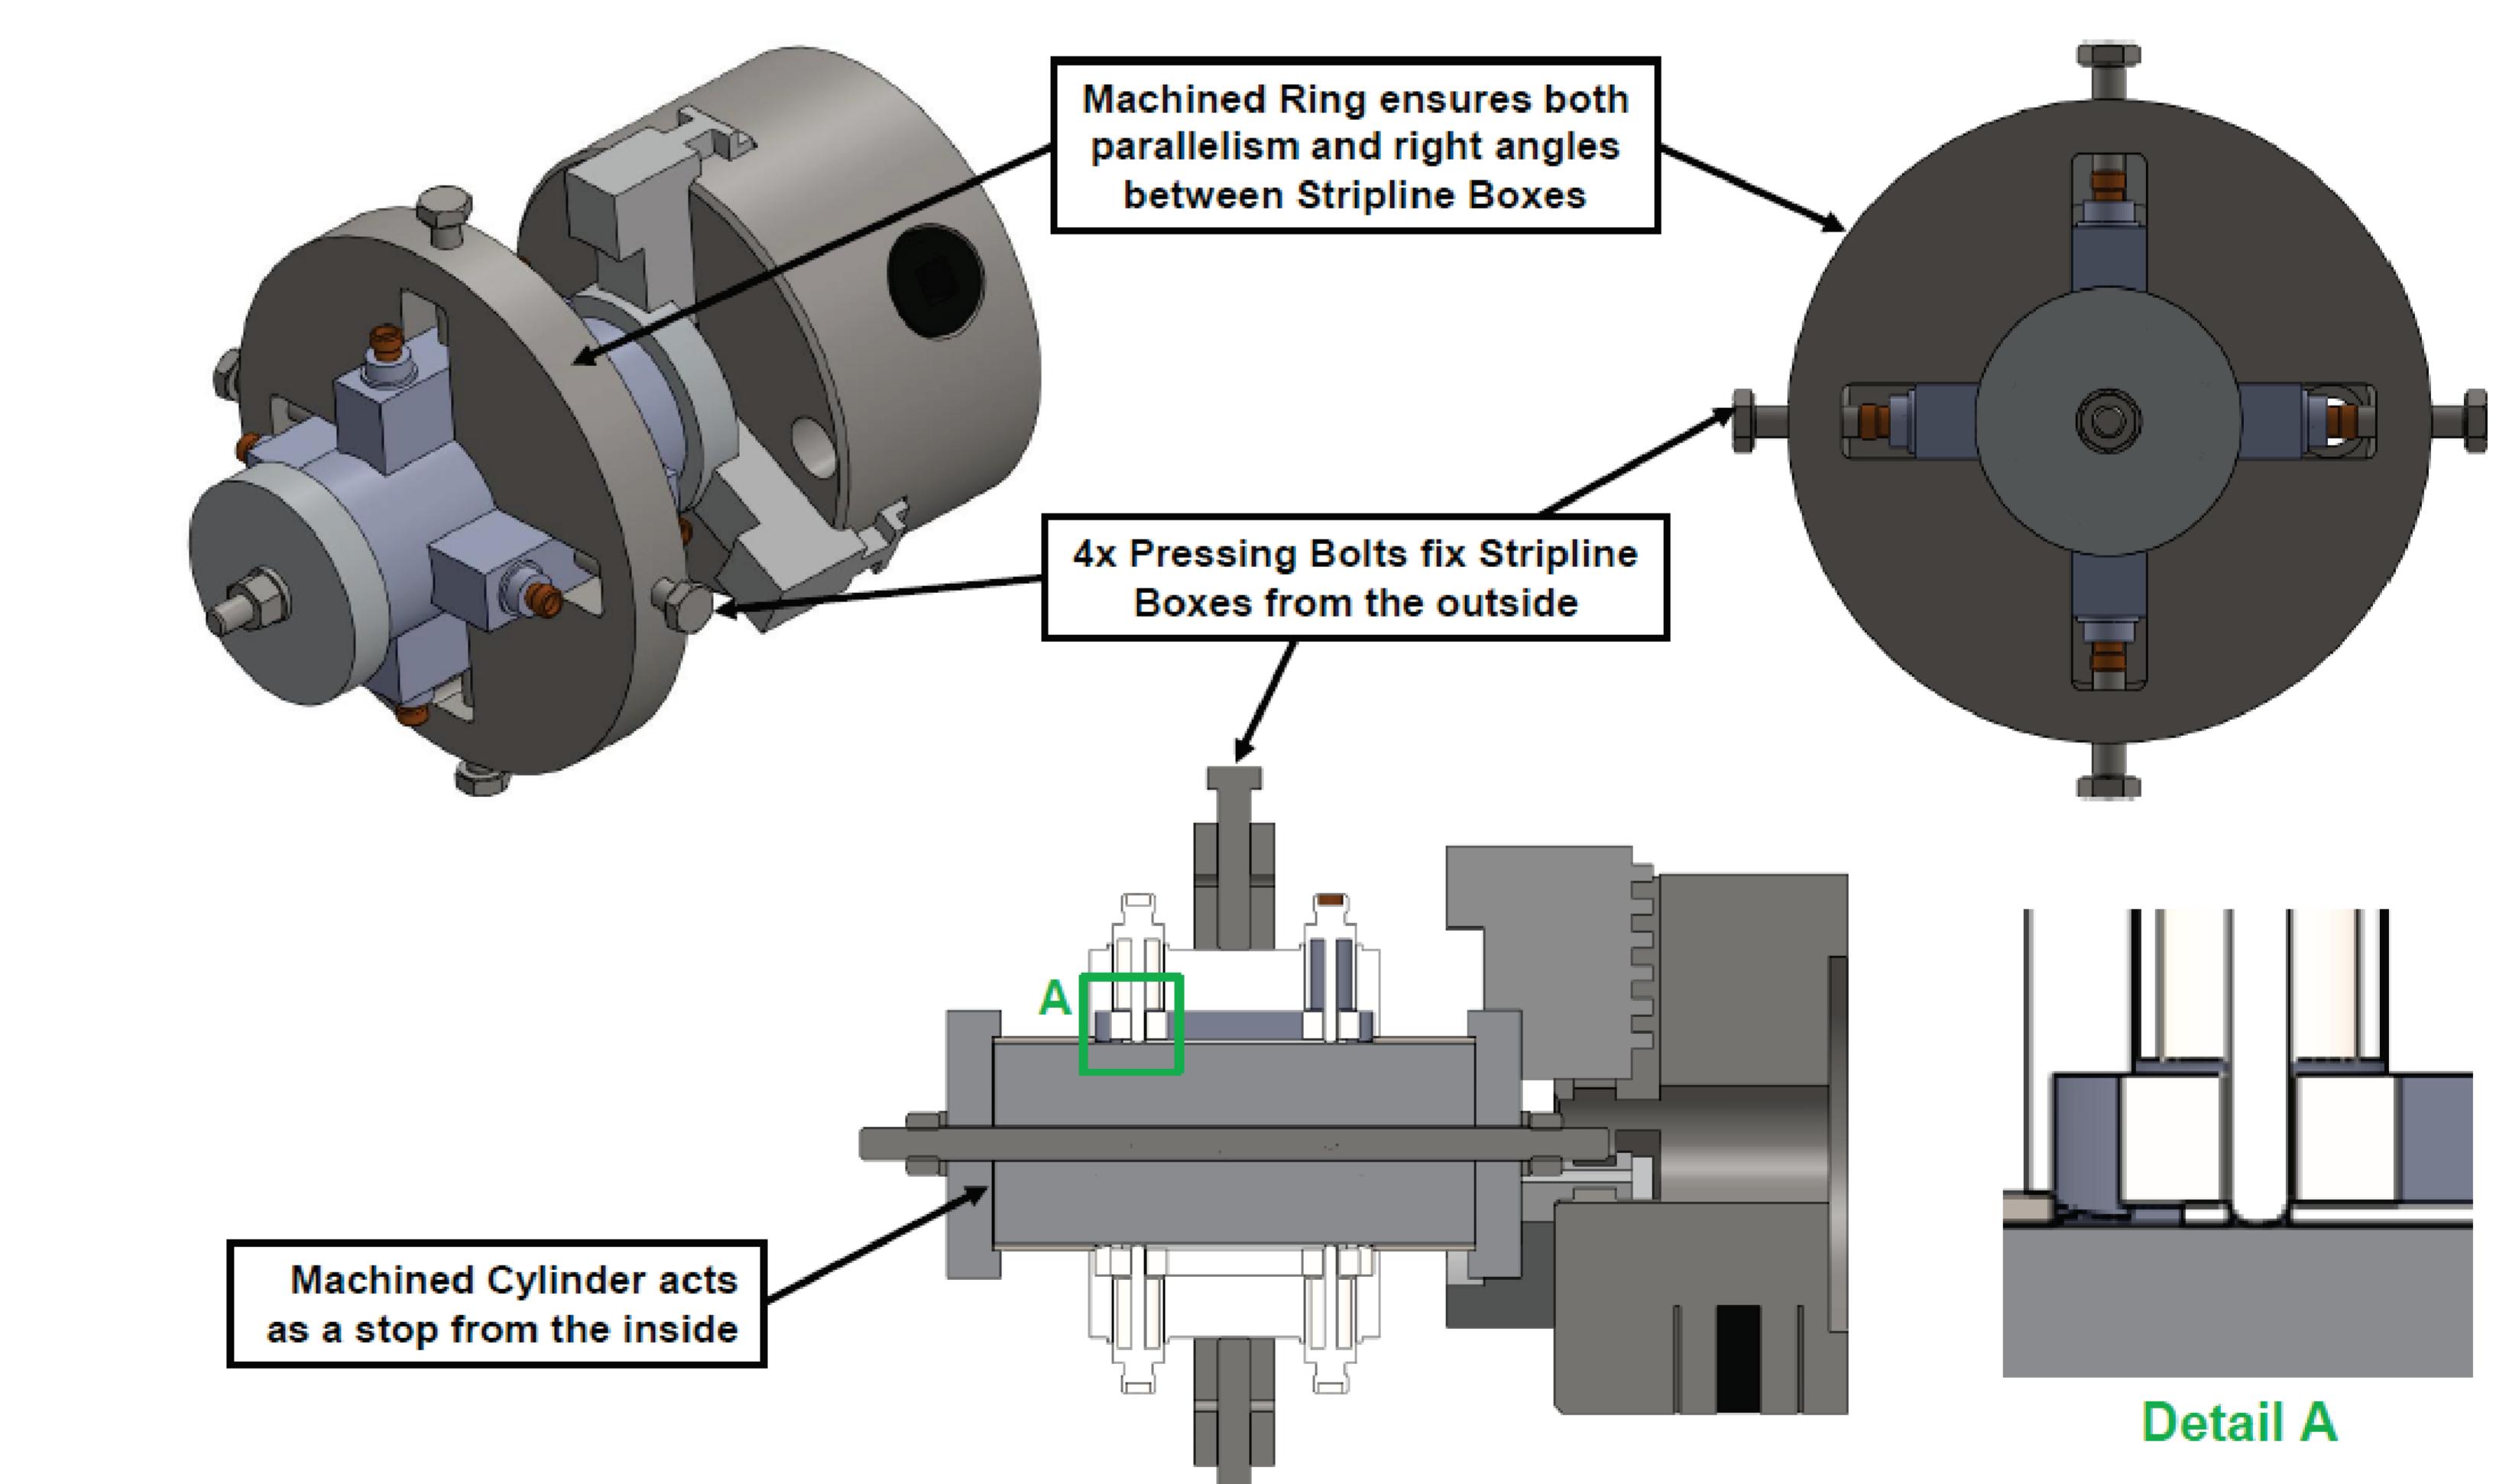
Fabrication tools for linear and angular alignment/welding.
